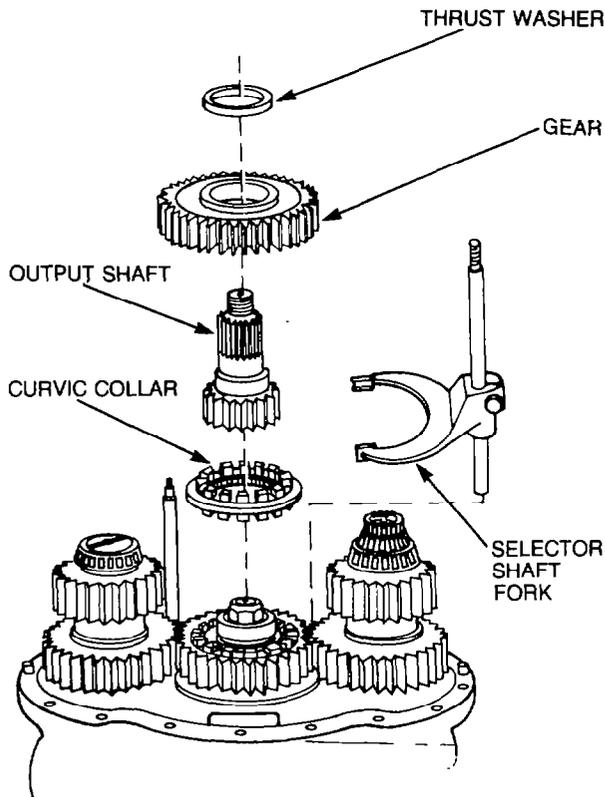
Low Splitter Gear and Output Shaft — Removal
